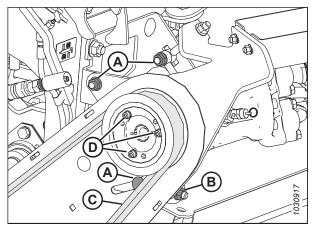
Drive Pulley – Conditioner Drive Motor
